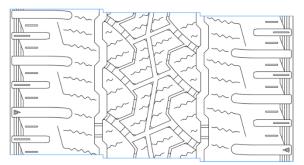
Drawing of tire tread pattern in the AutoCAD environment
